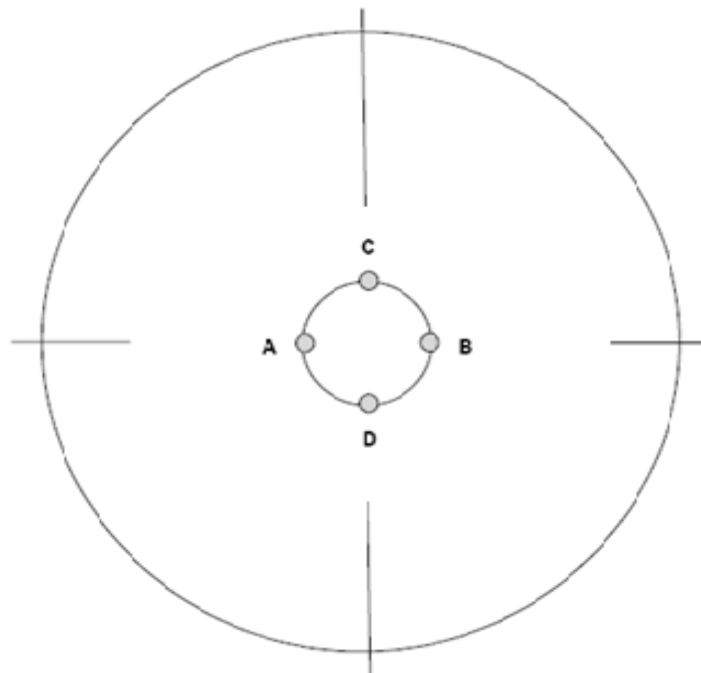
, Tack Welding from INSIDE the vessel head
